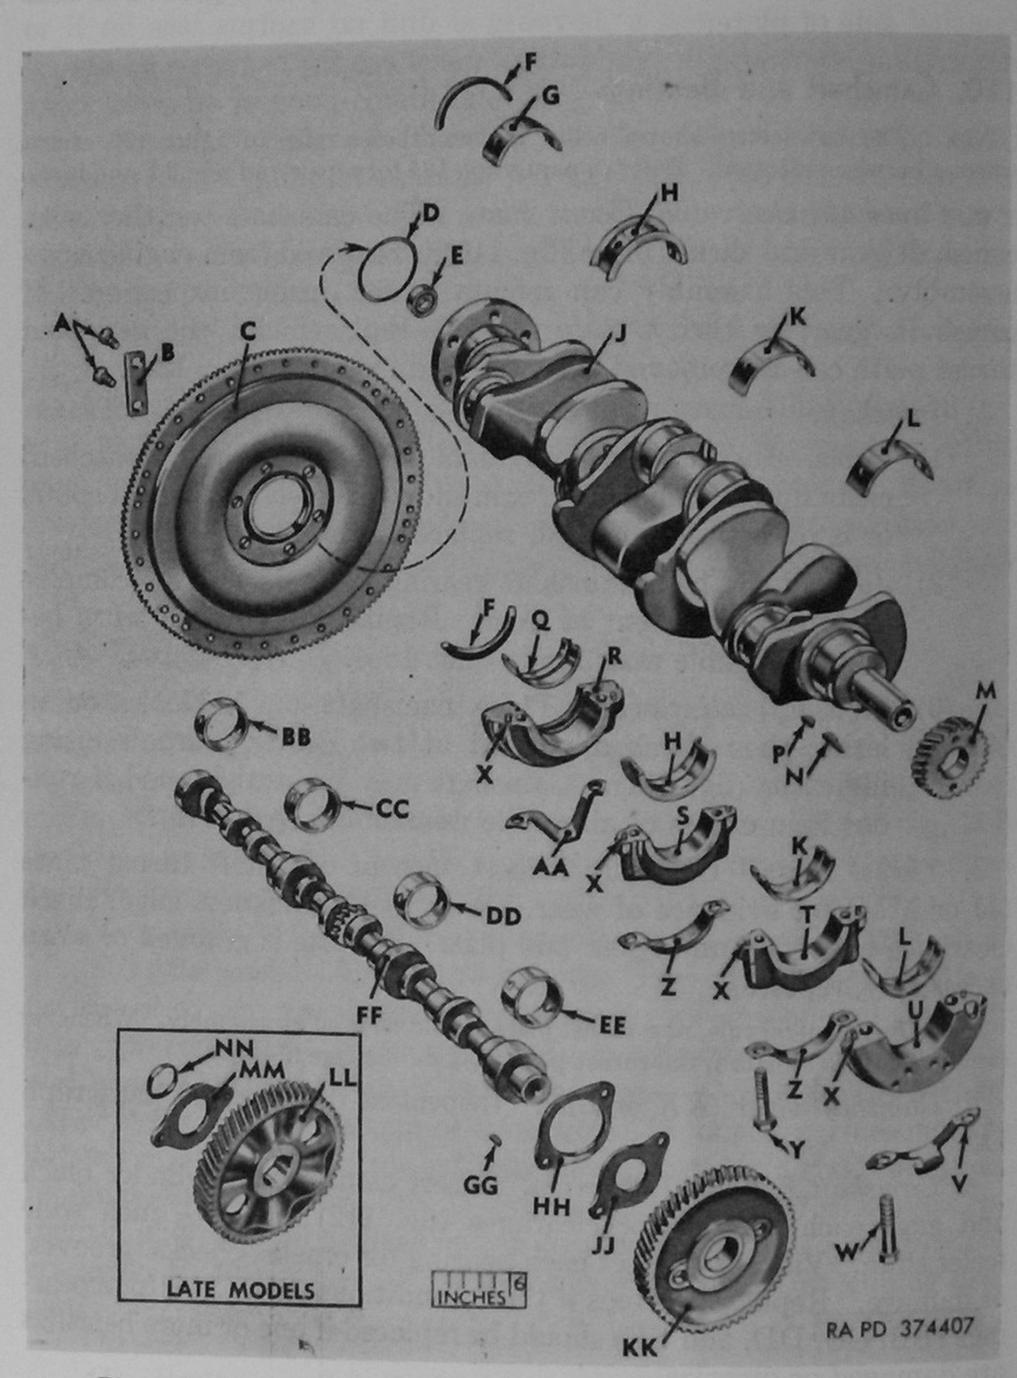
Crankshaft, camshaft, bearings, and timing gear components.
